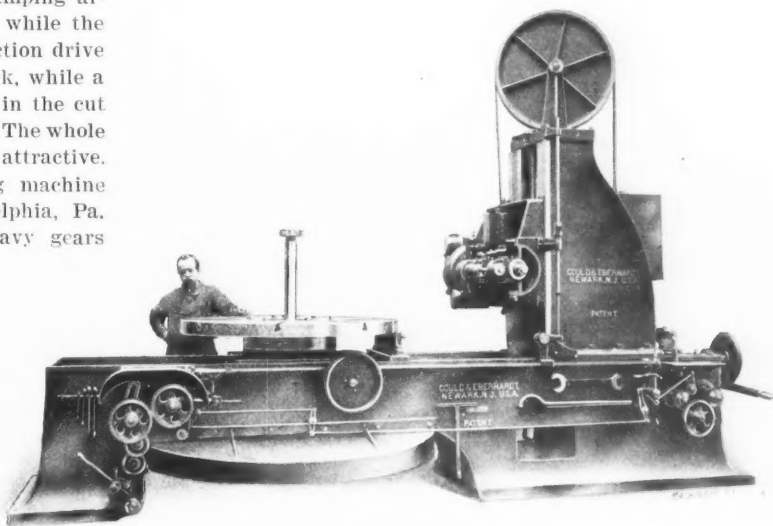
The Horizontal Type of Gear-cutter, as built by Gould & Eberhardt.
